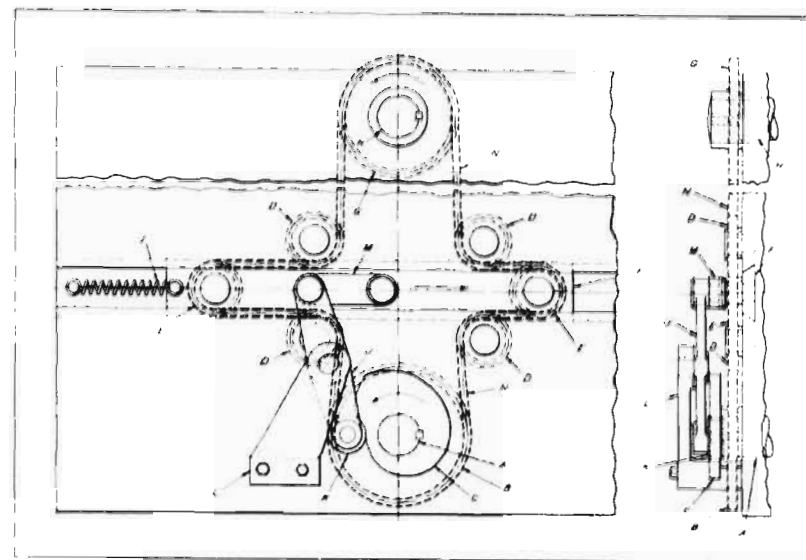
Practical design for producing intermittent rotation in a driven shaft *H* from a uniformly rotating driving shaft *A*.
